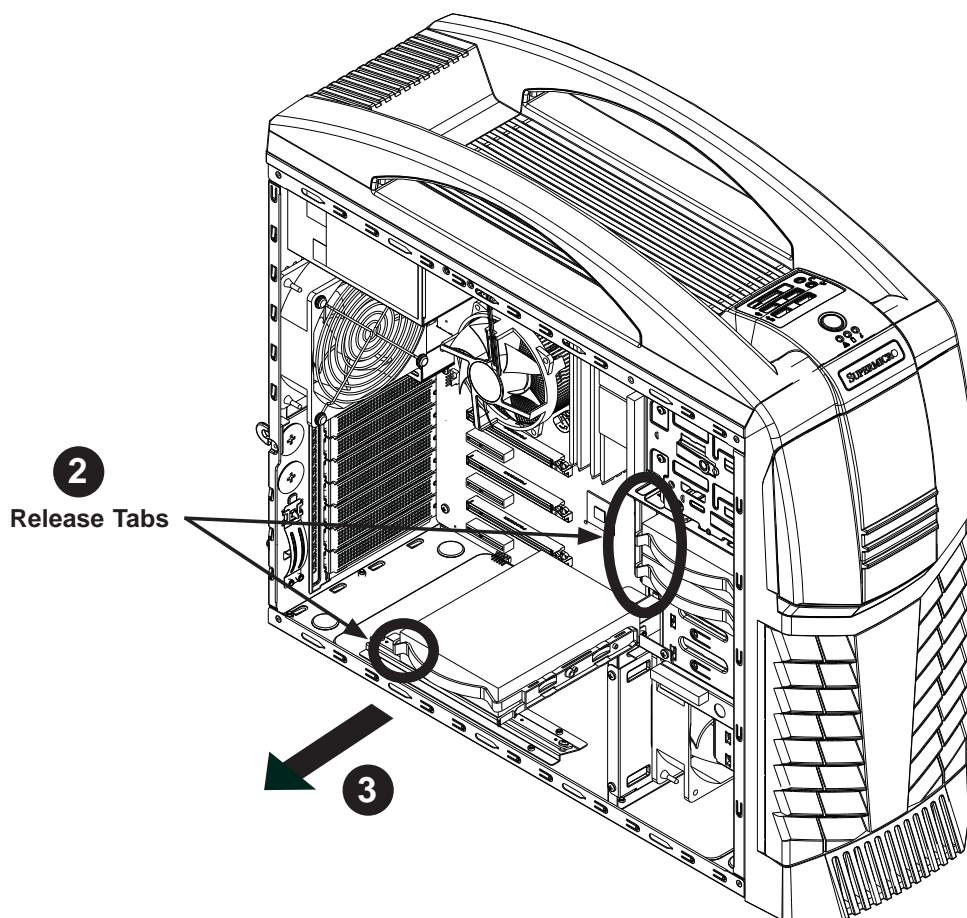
Removing a Hard Drive Carrier from the Hard Drive Cage
